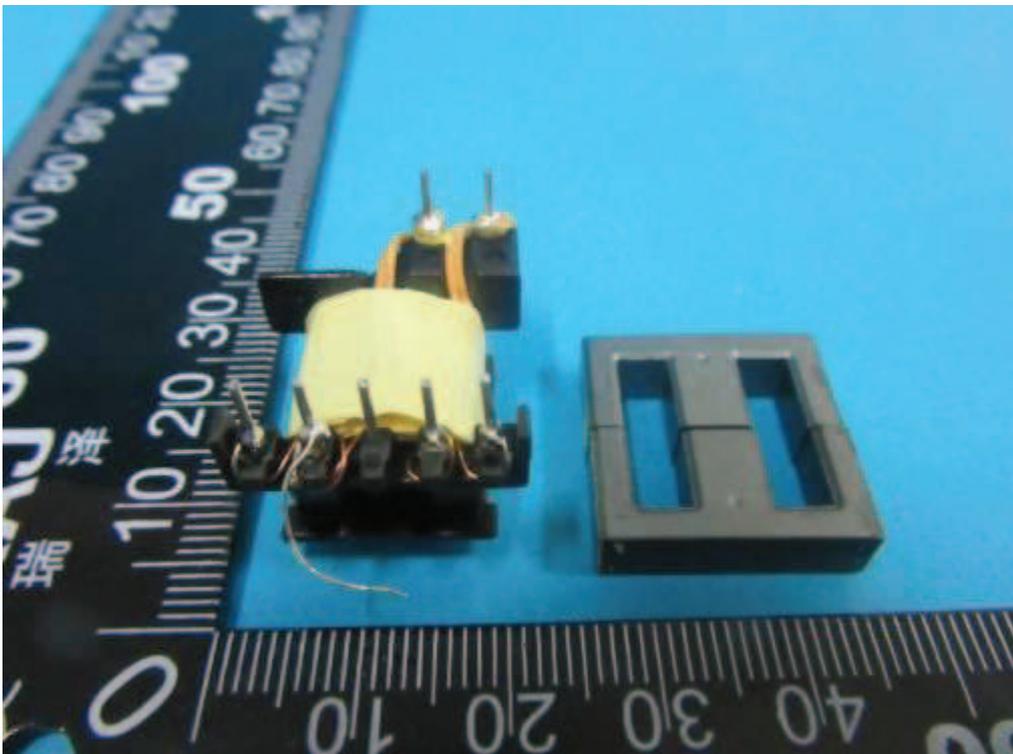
Detail view of transformer (for 90E12PU05-xxxx)
